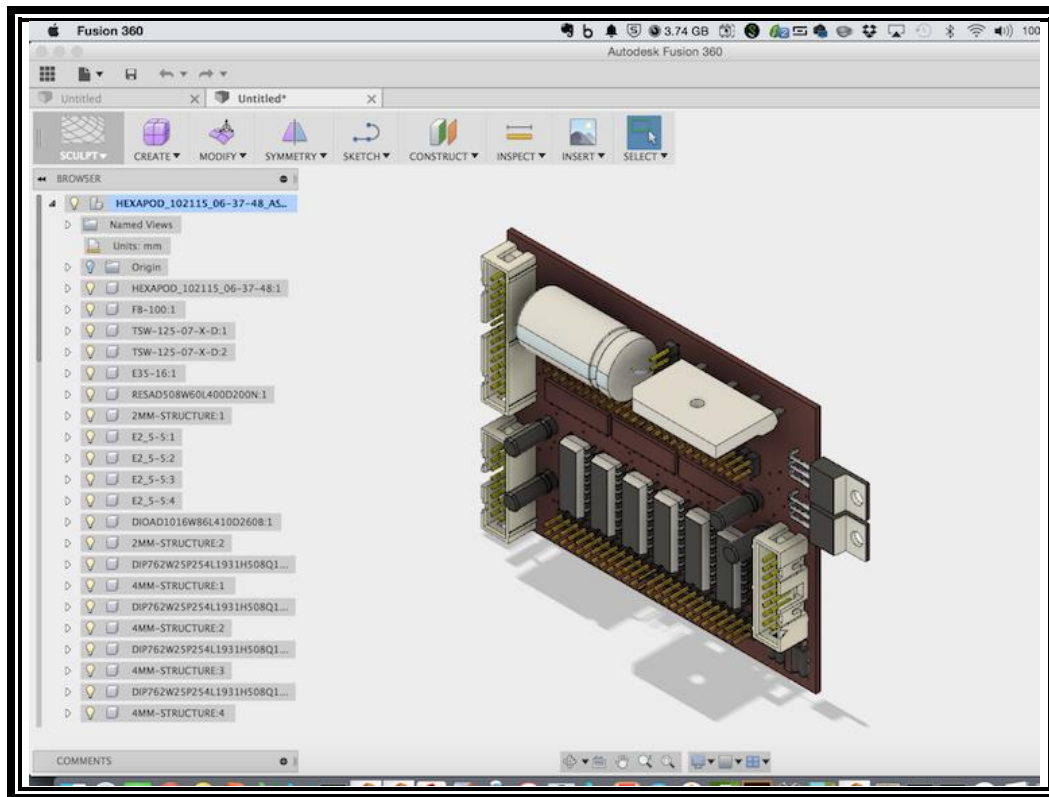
An EAGLE PCB design imported into Fusion 360 [26].
